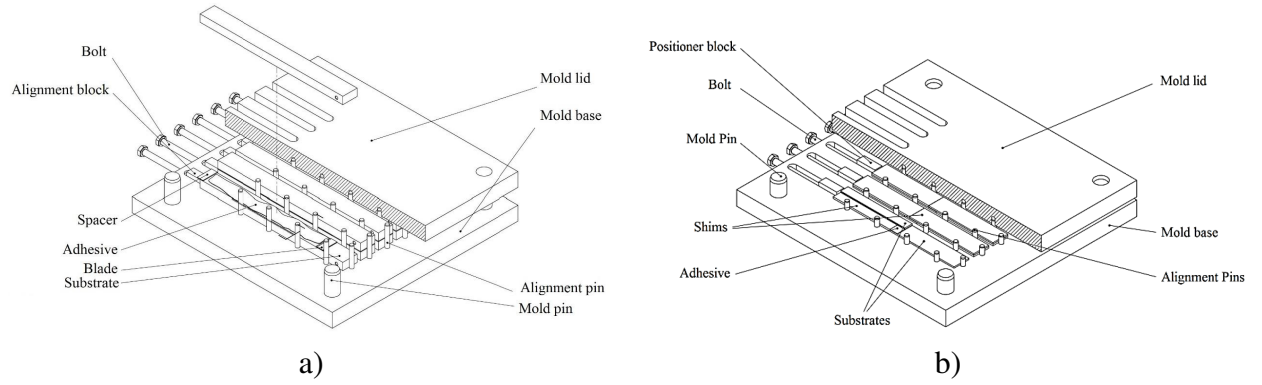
Schemes of Mold for a) fracture specimens manufacture and b) single lap joints manufacture. [98].
